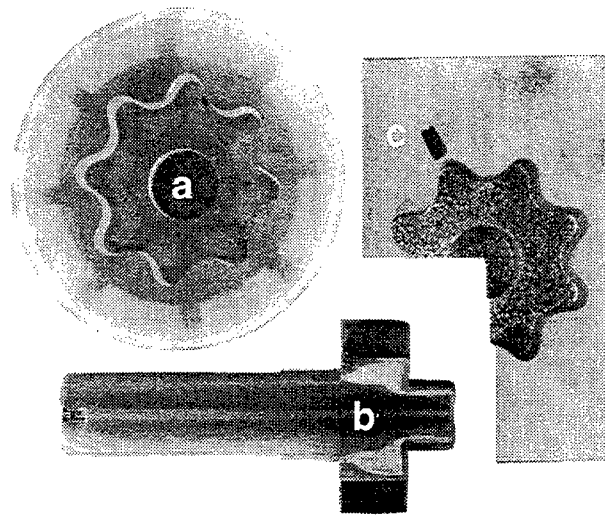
a) SLA master, b) Cu electrode, c) workpiece; both electrode and workpiece were sectioned to make SEM observations. On section of electrode is visible the deposited layer of copper.
